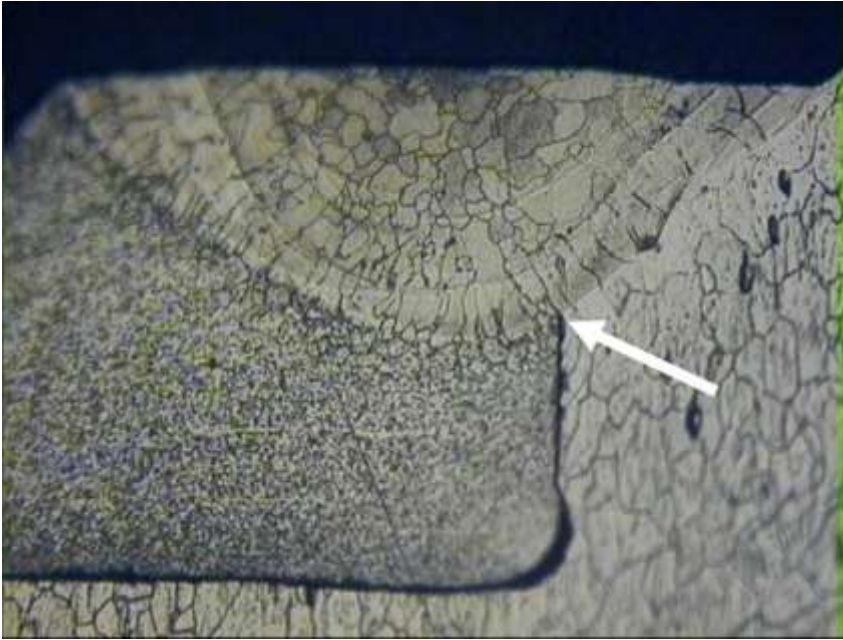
Photo above shows a laser weld with partial penetration that will produce a high stress point (marked with a white arrow) which can lead to crack growth and failure during testing.
